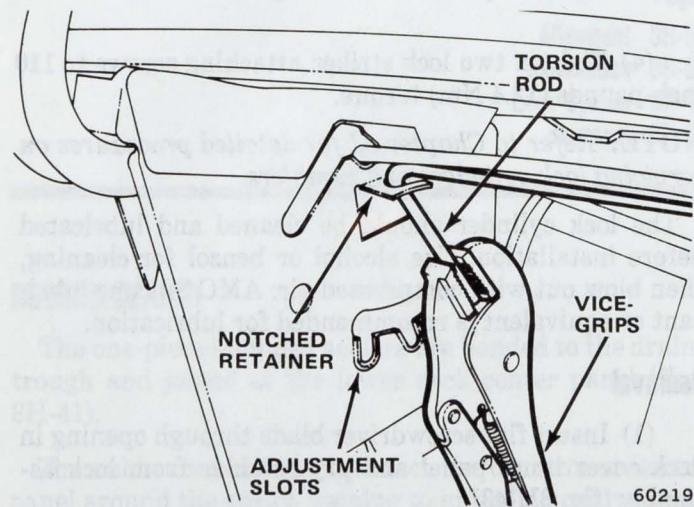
H-44 Deck Cover Torsion Rod Adjustment
